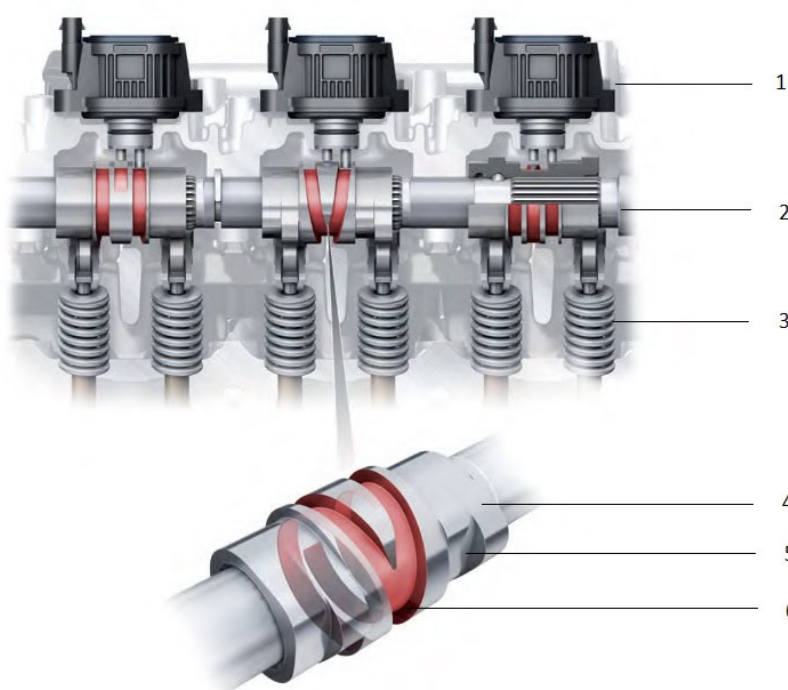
Audi AVS: 1 – Electric actuator of the sliding module; 2 – Intake camshaft; 3 – Intake valves;
